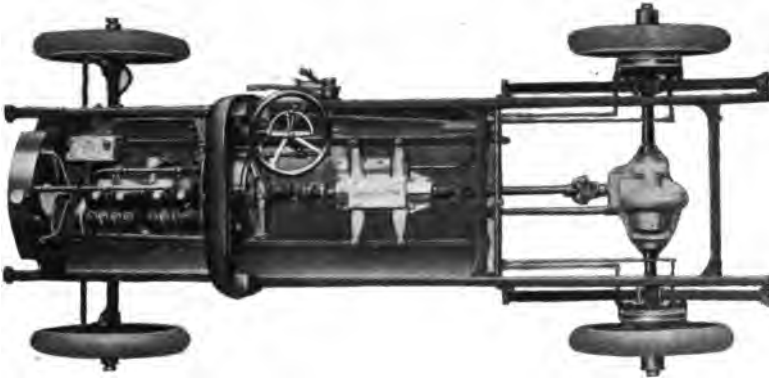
Chassis of Studebaker Model L Car, Showing Direct or Shaft Drive, with Two Universal Joints.
